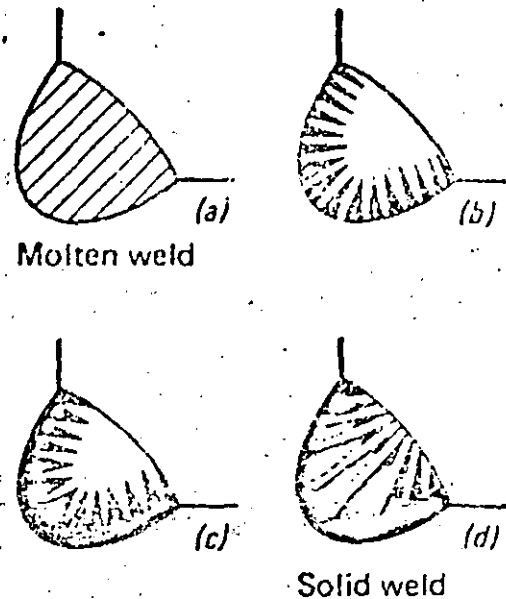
A molten fillet weld (a) starts to solidify along the sides next to the plate. (b). Solidification proceeds as shown in (c) and (d).
